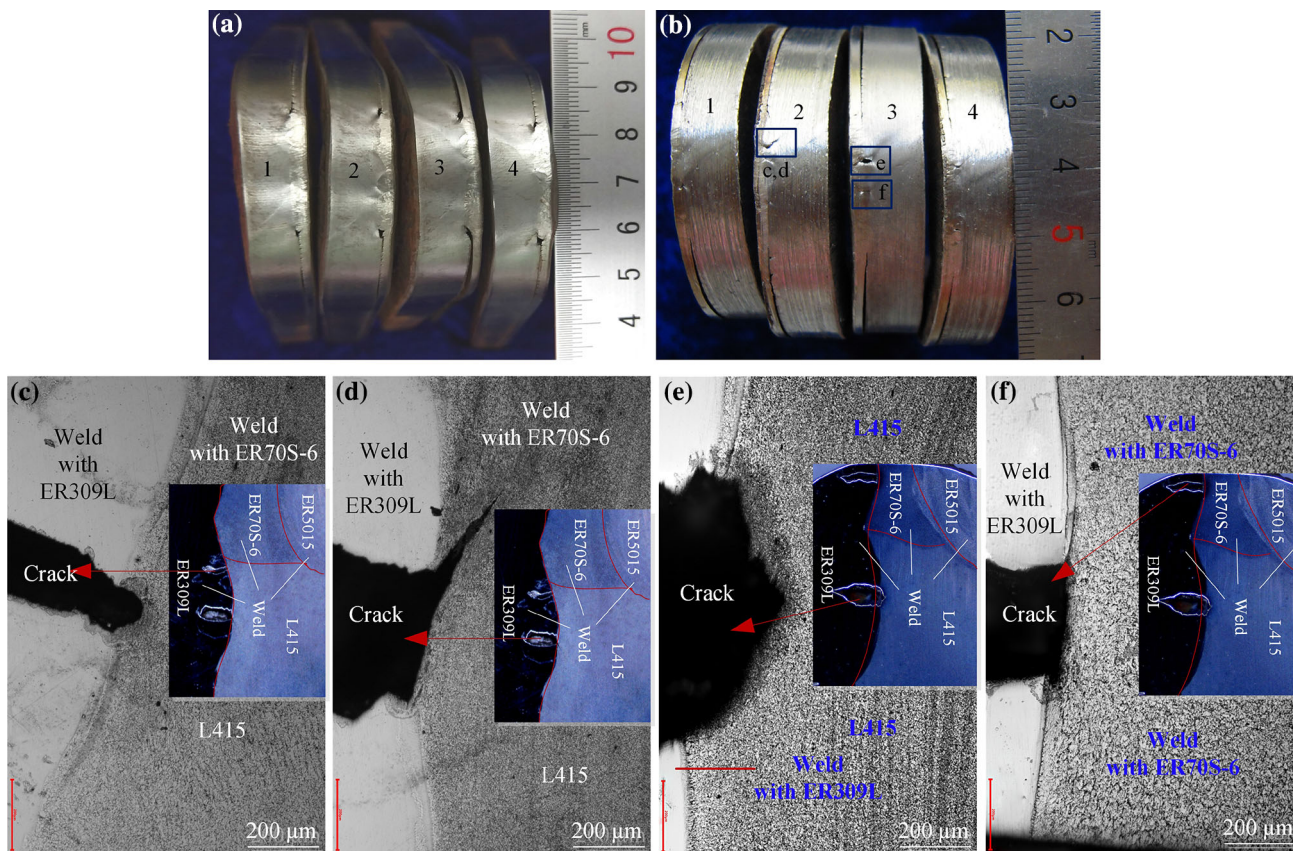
Side-bending specimens and cracks macromorphology of 309MoL (a) and 309L (b); c and d cracks on No. 2 specimen of 309L; e and f cracks on No. 3 specimen of 309L
